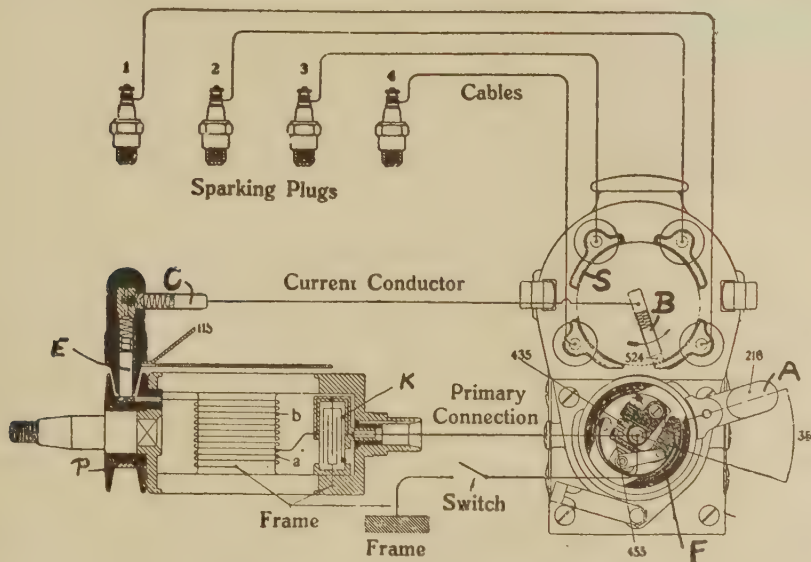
Showing Layout of a Typical Magneto (Bosch).
